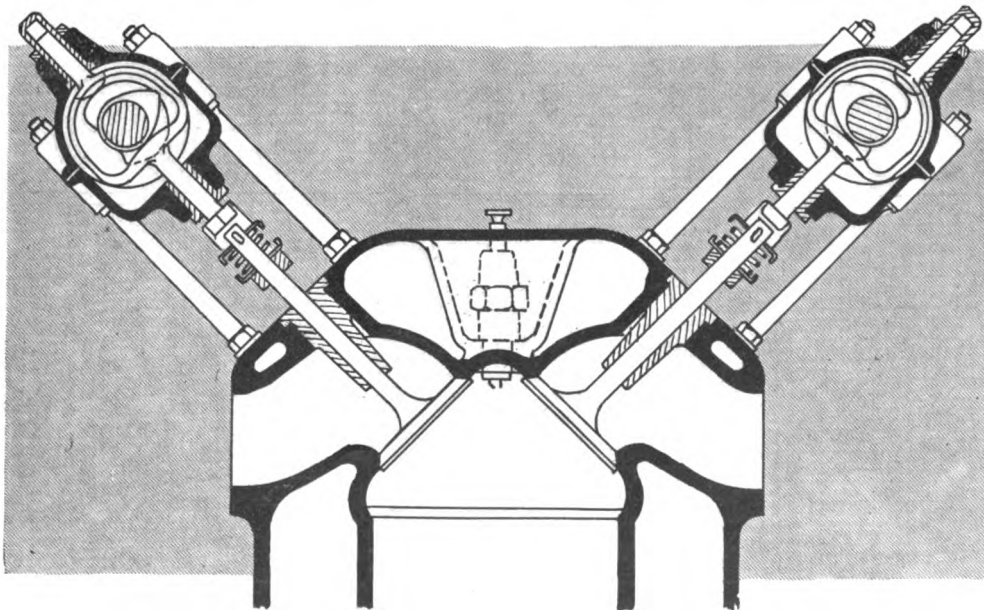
Arrangement of the springless inclined valves in the Delage, which has two overhead camshafts and sixteen valves.
